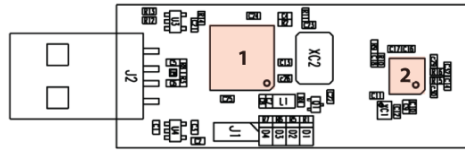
RavenUSB Front Assembly - Showing the primary components:
